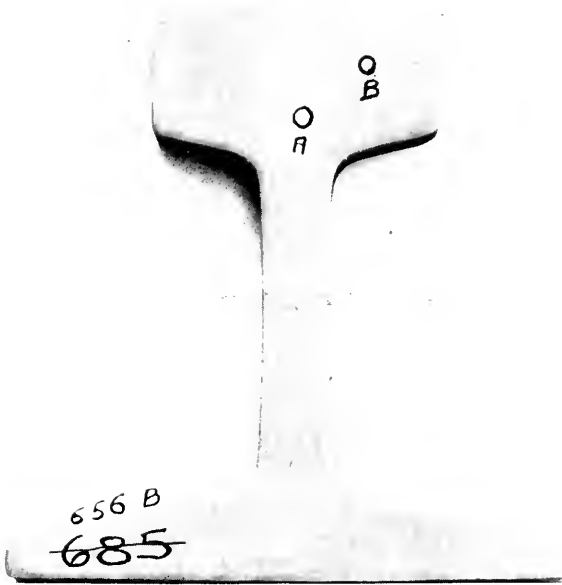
B. LIGHT ETCHING OF RAIL 656.
